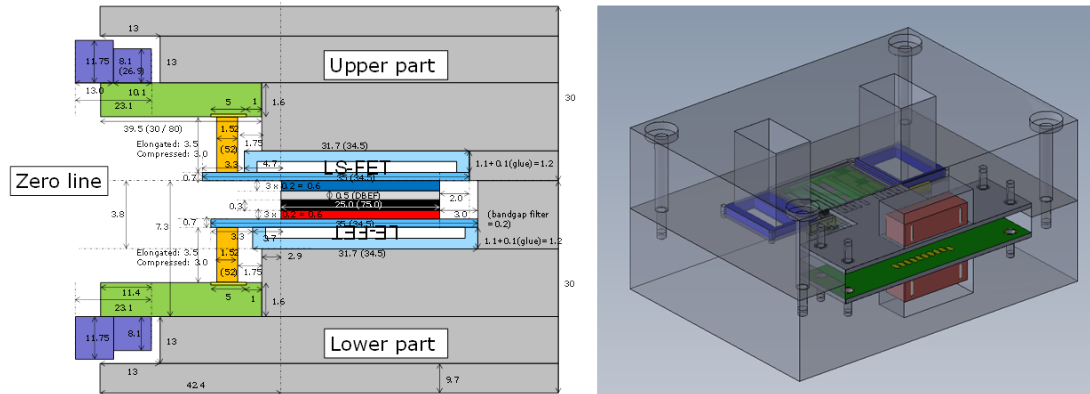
(left) Cross-section of Gen 1 holder for testing LE-FET and LS-FET(right) 3D assembly of the whole stack
